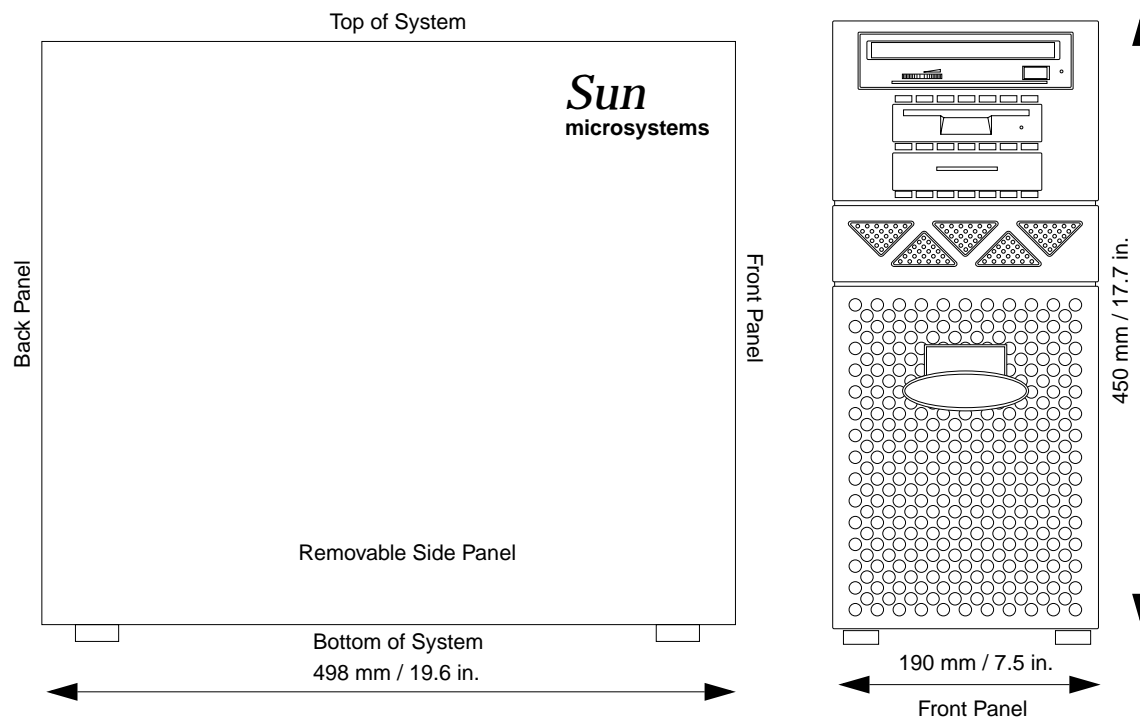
Ultra 30 System Enclosure Physical Dimensions
